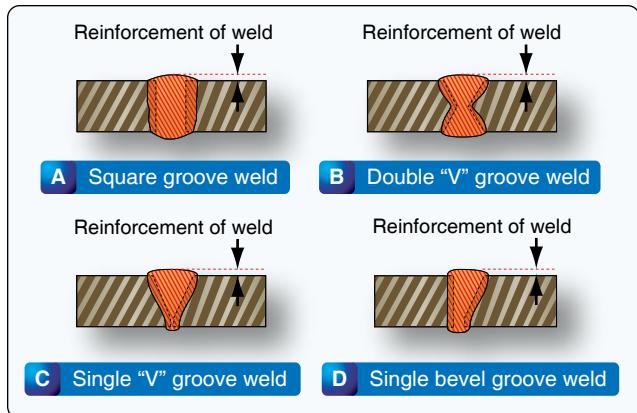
Groove welds on butt joints in the flat position.
